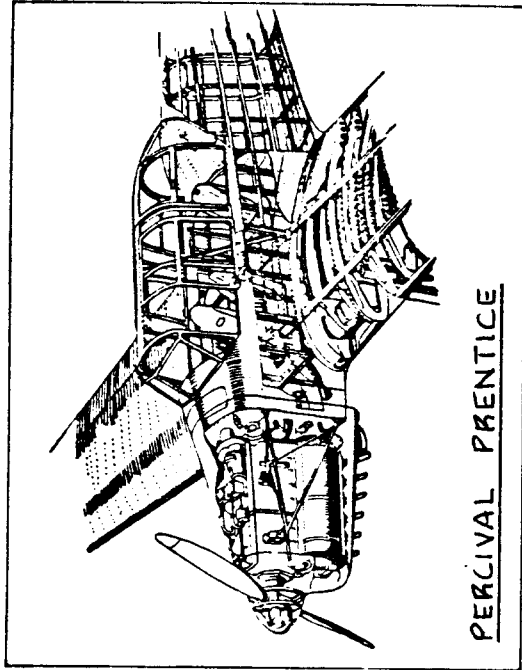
Cabin and Baggage Hold Dimensions for Single Engine Piston/Propeller Driven Airplanes
